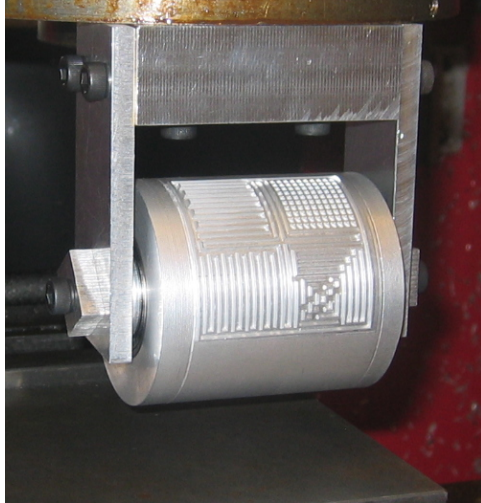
Claw Attachment and Roll Fixed to Machine Tool
